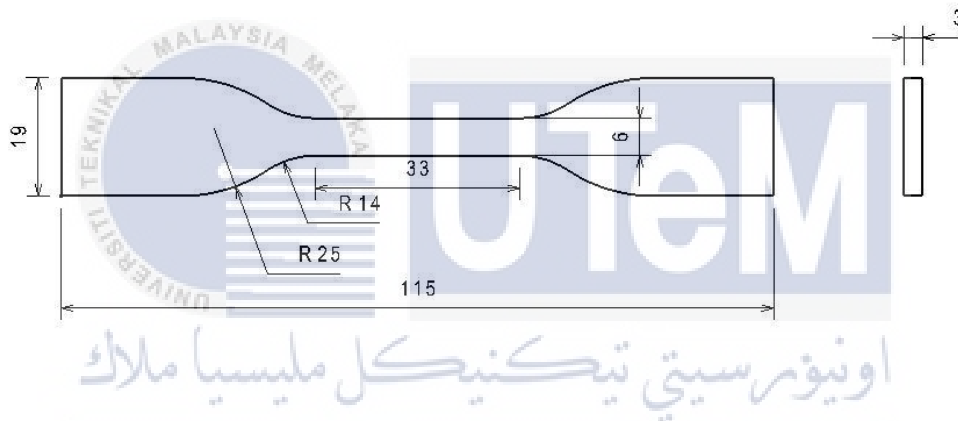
Dimension of tensile specimen based on the ASTM-D638 (Type IV) standard
